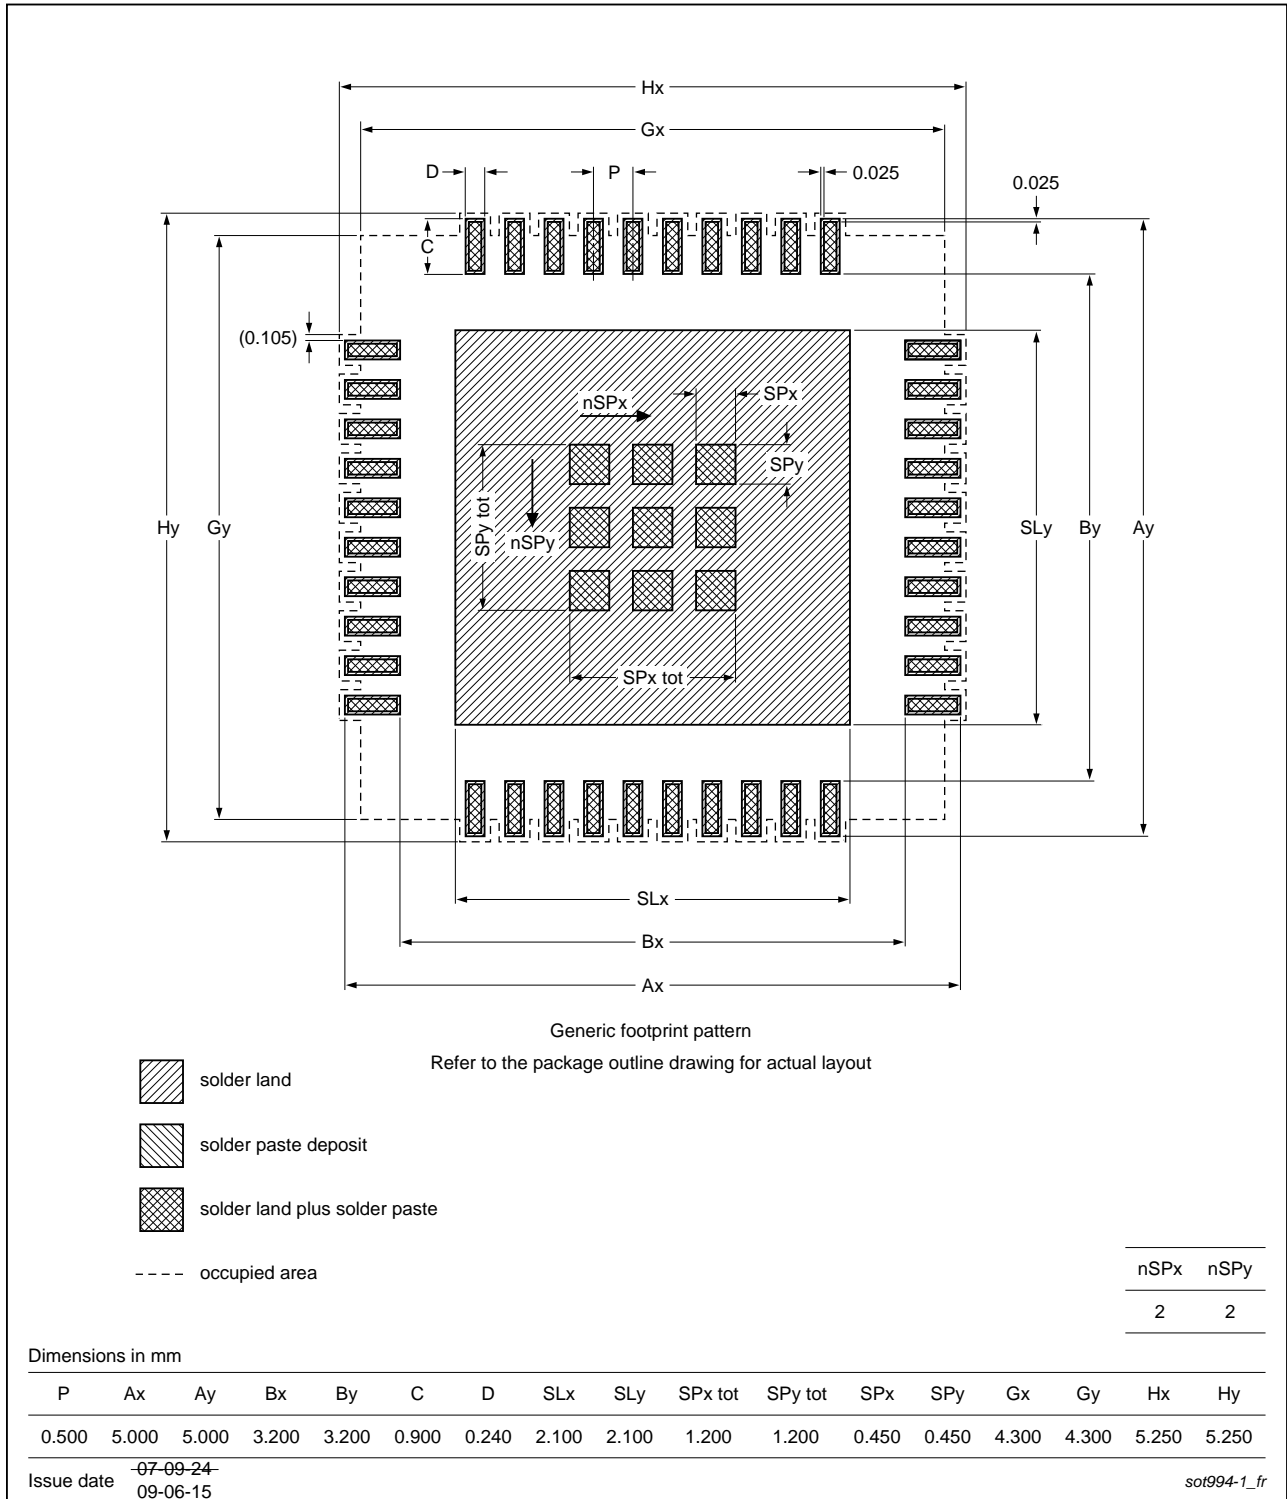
PCB footprint for SOT994-1 (HWQFN24); reflow soldering
